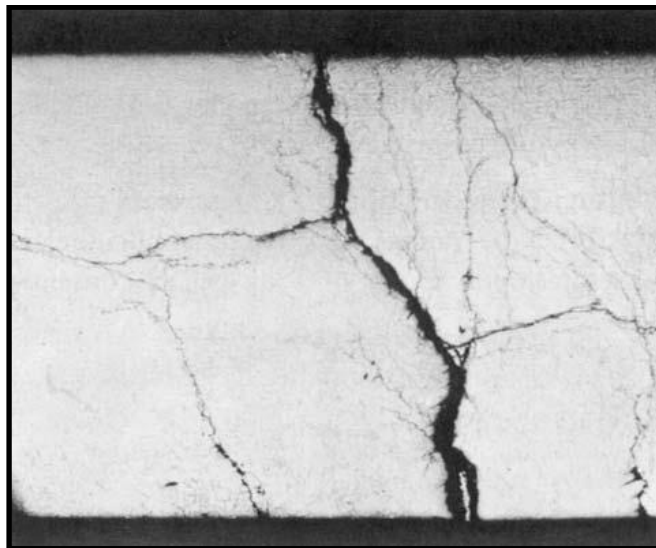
Stress corrosion cracks in tube of AISI 304 steel.
